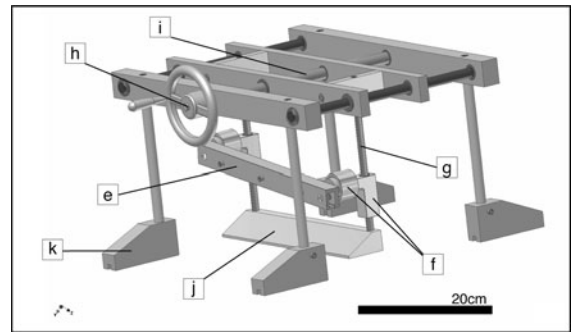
CAD image of cutter assembly. Parts of the microtome: knife holder (e), pivot (f), rod (g), crank wheel (h), bolt (i), metal foot (j), sediment cutter foot (k)
